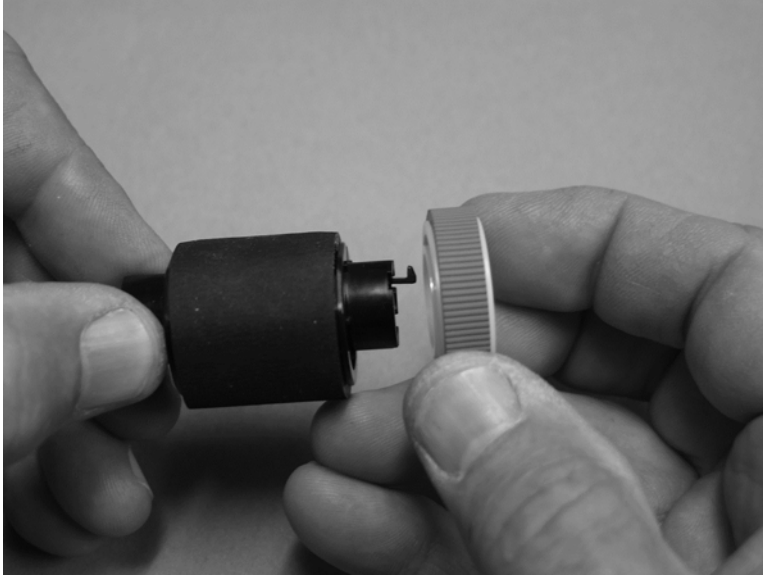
Reassemble the Tray 2, 3, or 4 pickup roller assembly (1 of 9)
